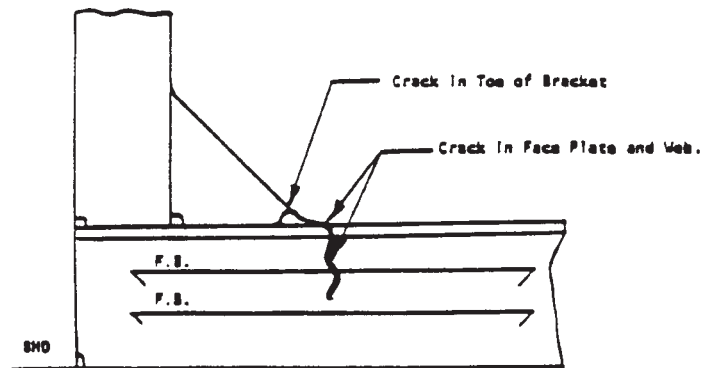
Fracture in Longitudinal Intercostal Girder
